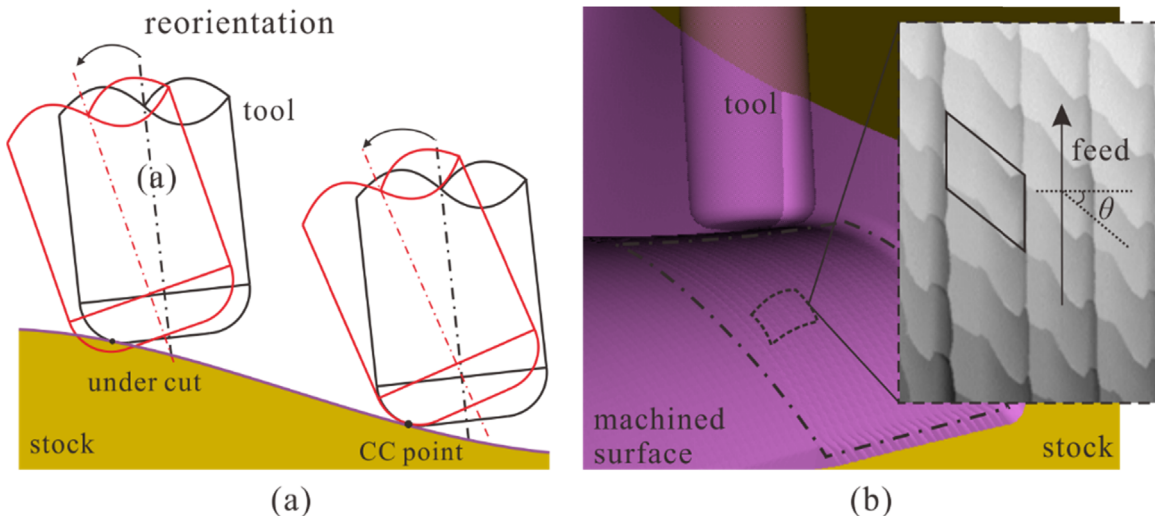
Problems with the tool path deformation method; (a) machining geometry error are not respected; (b) irregular finished surface textures appear.
